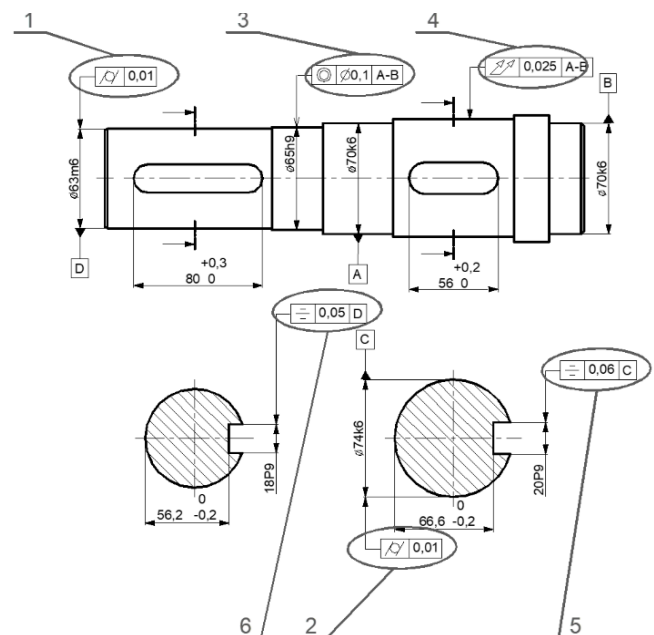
Prescription of geometric tolerances on the shaft – example
